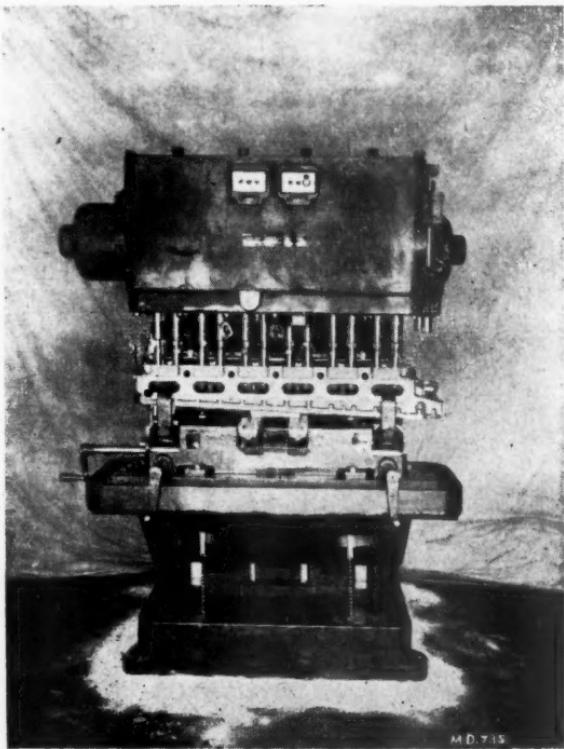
Archdale 24 Spindle Multi Tapping Machine.
